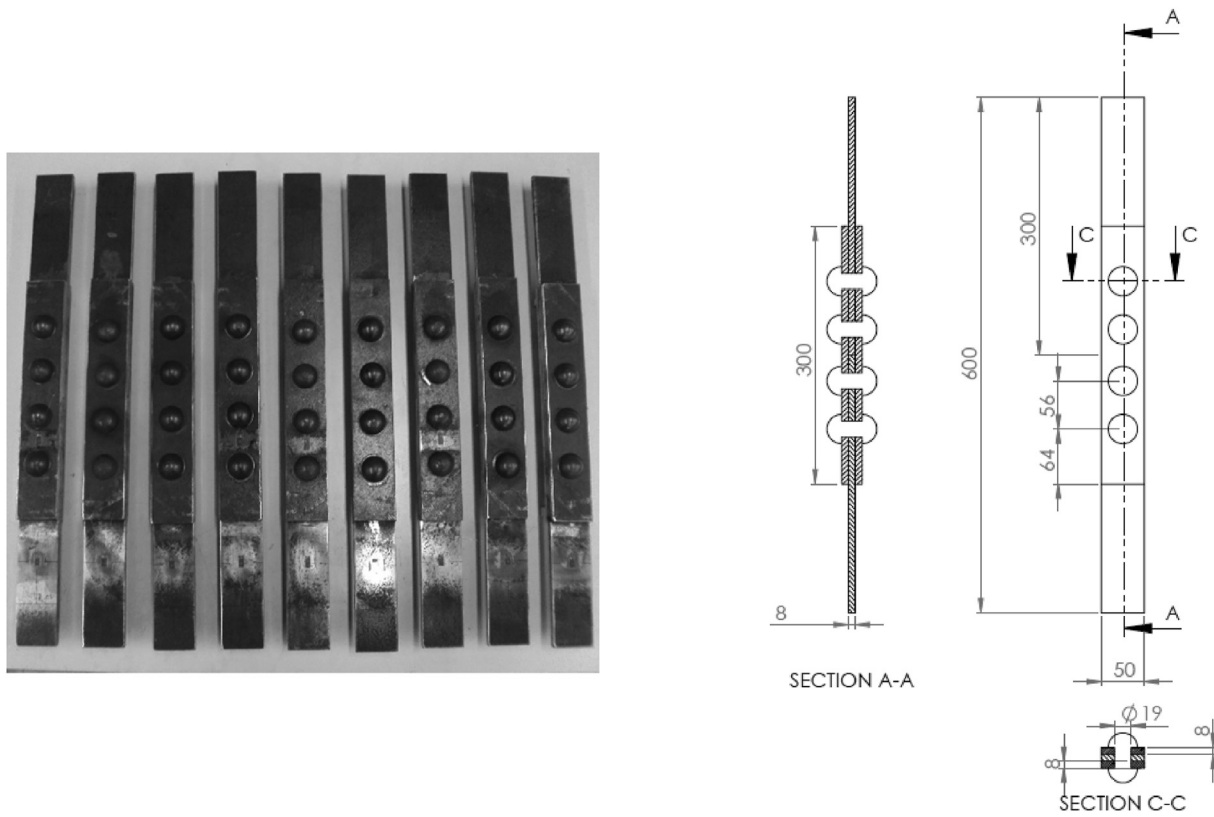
Single line double shear riveted (SLDSR) specimens [38].
